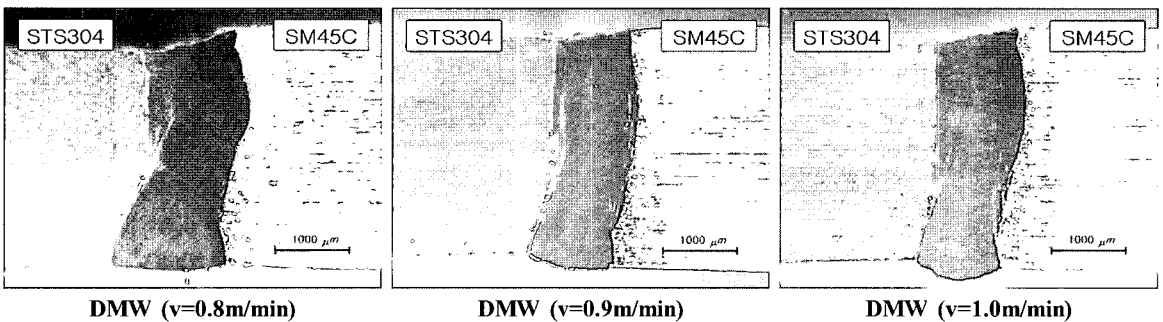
(b) Influence of Welding on the bead shape(DMW)
